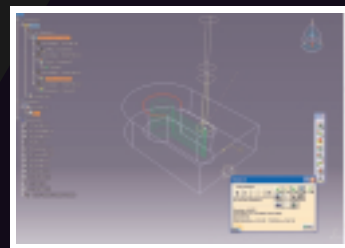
Pocket milling (Machining time is displayed in the window -bottom right)
